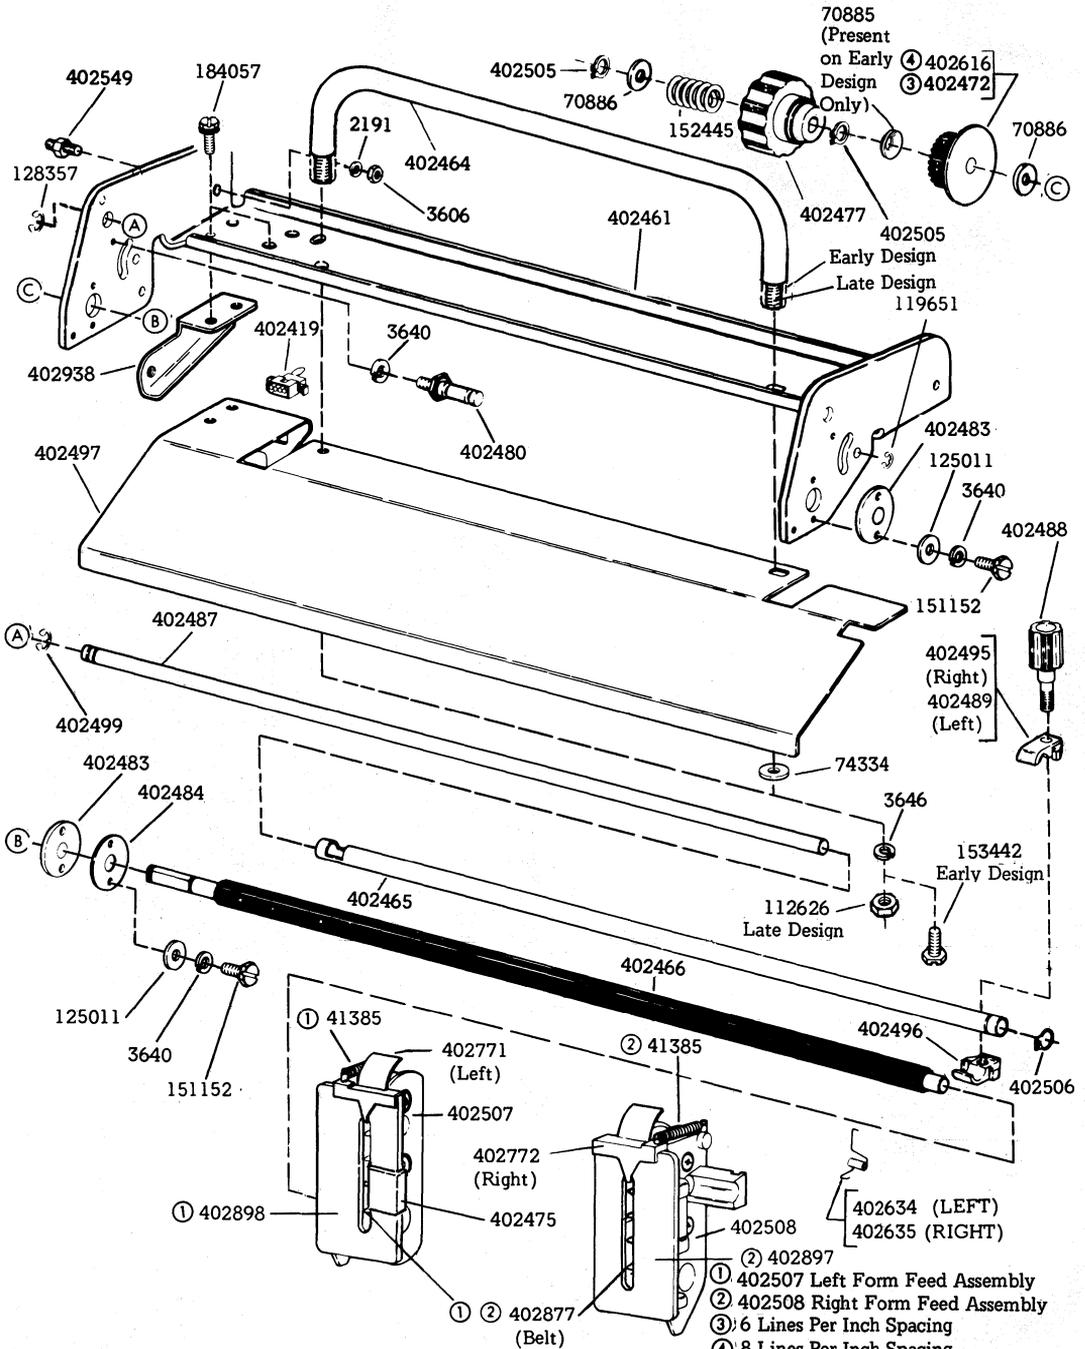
Paper Handling Assembly (Tractor Feed - 80-Column)
